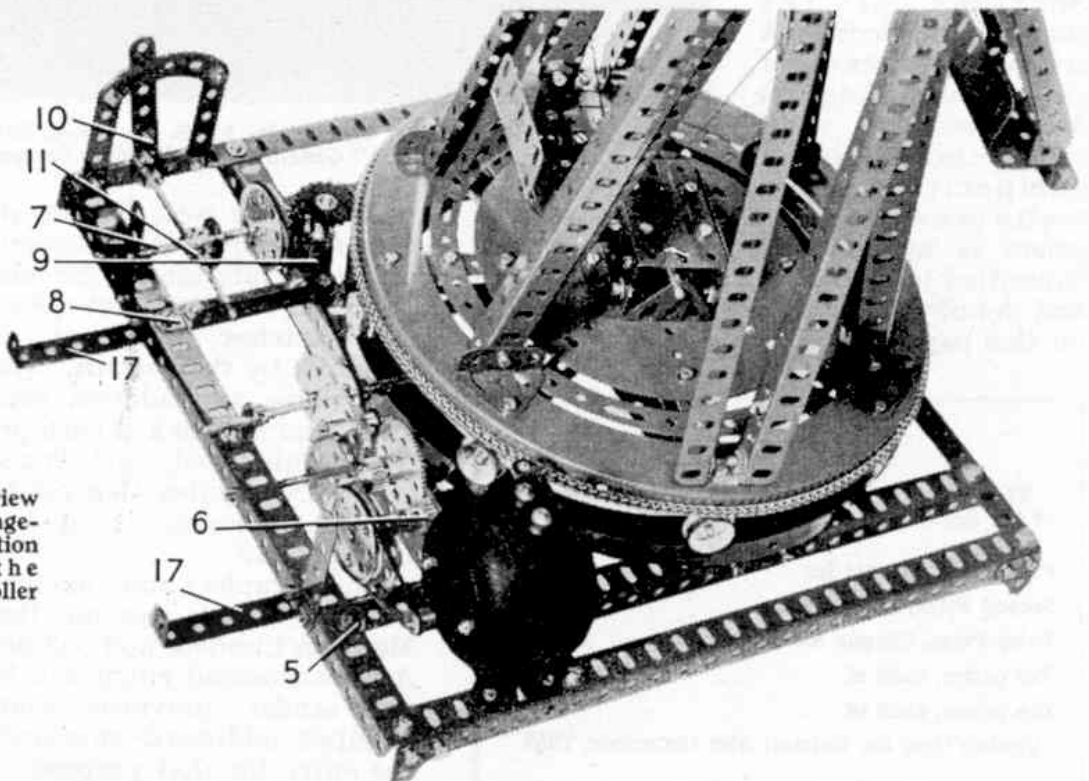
This view shows the arrangement of the friction clutch and the drive to the roller bearing.
